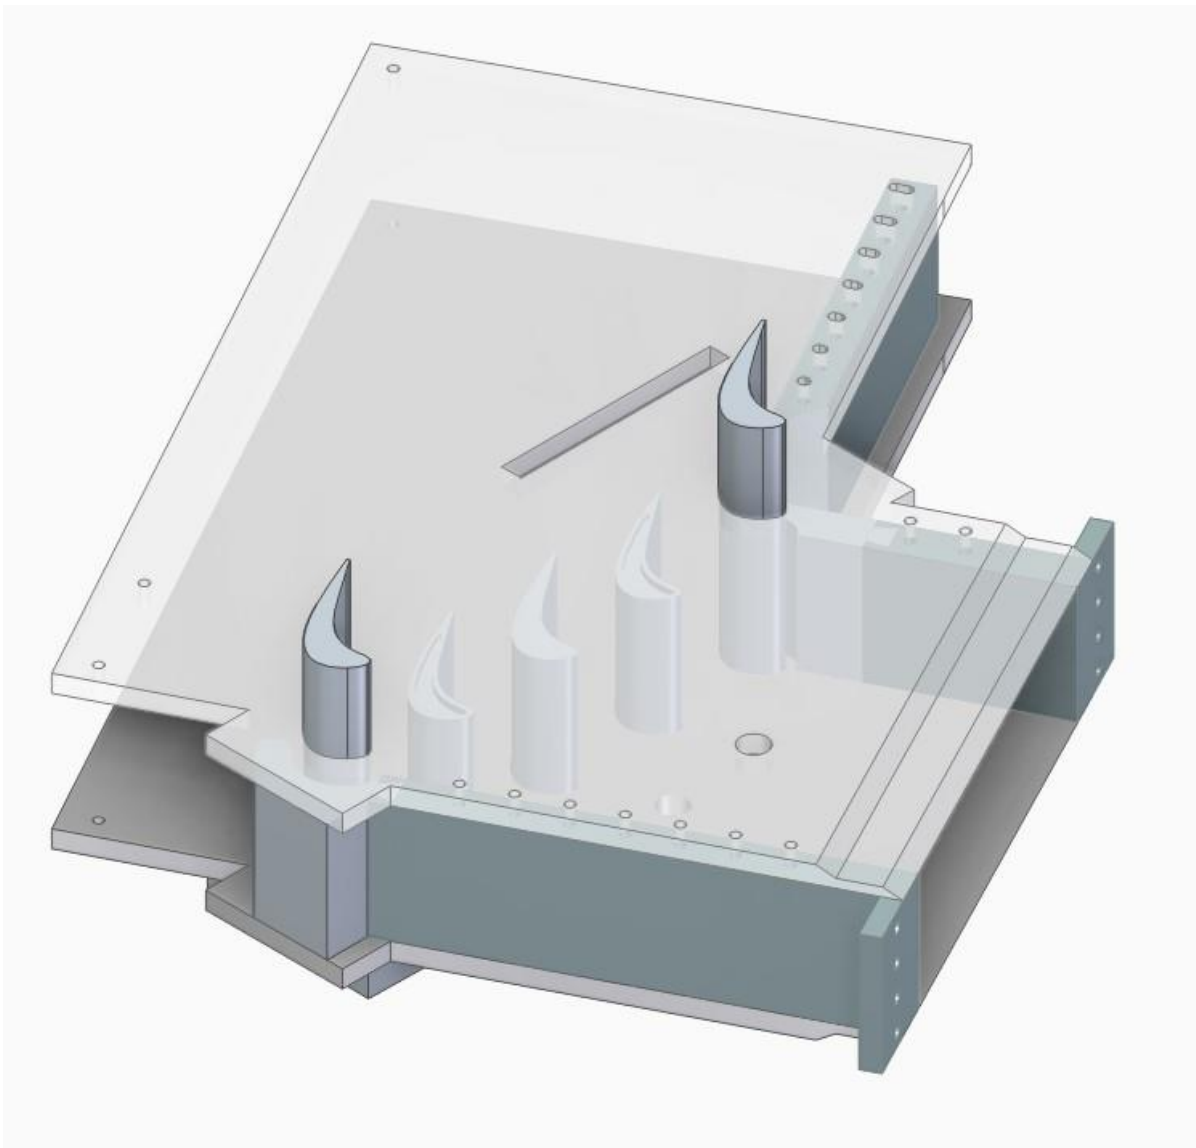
Three-dimensional isometric view of the linear cascade assembly at the inlet.
